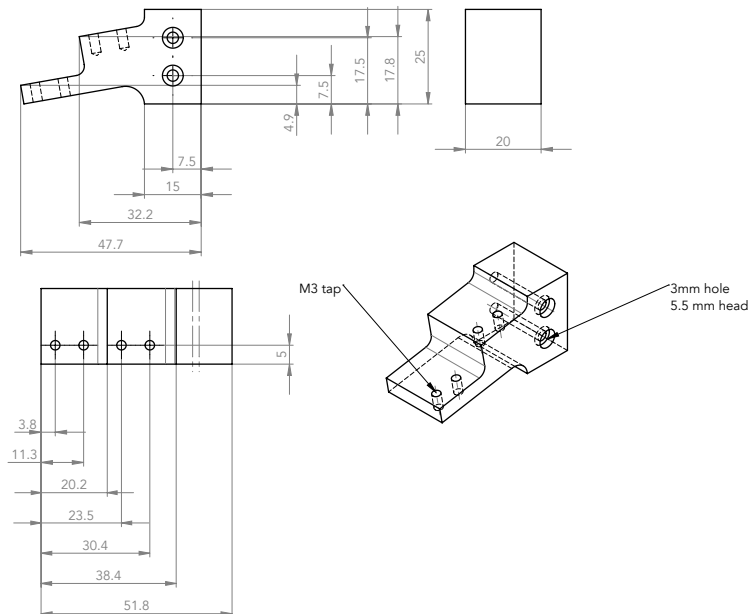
Technical drawing and measures of the 2nd set of connectors of the LFO flexures.
